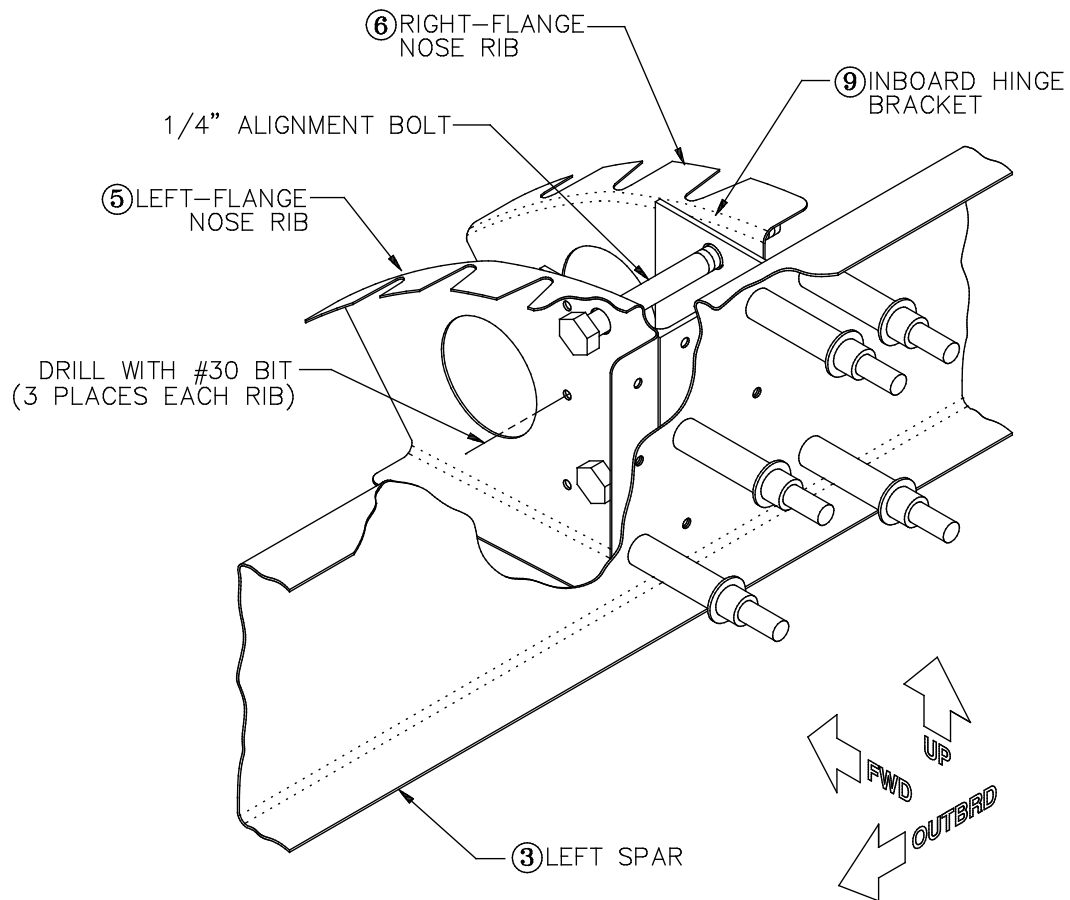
Drilling the Hinge Bracket/Rib Web Rivet Holes
